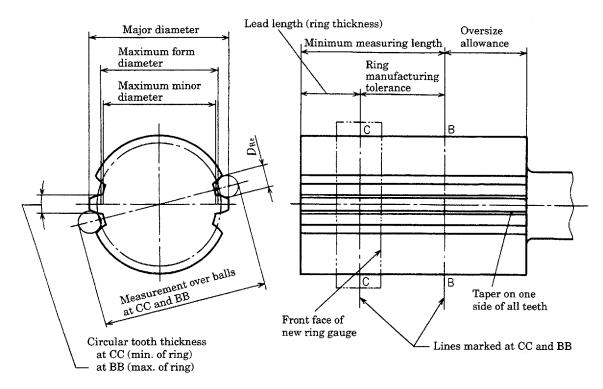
Tapered tooth master plug gauge for NOT GO two-sector ring gauge
